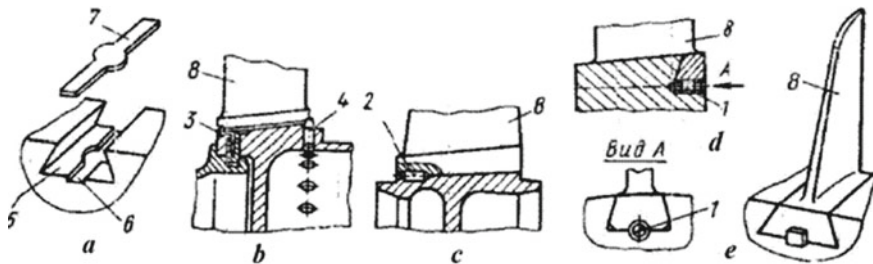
Fixation of the blades at dovetail method of mounting: *a*—general view of the connection; *b, c, d*—methods of fixing the blades; *e*—fixed blade; 1—threaded rod; 2—axial pin; 3—plate stopper; 4—radial pin; 5—groove for blade; 6—groove for the fixing plate in disk; 7—fixing plate; 8—blade
